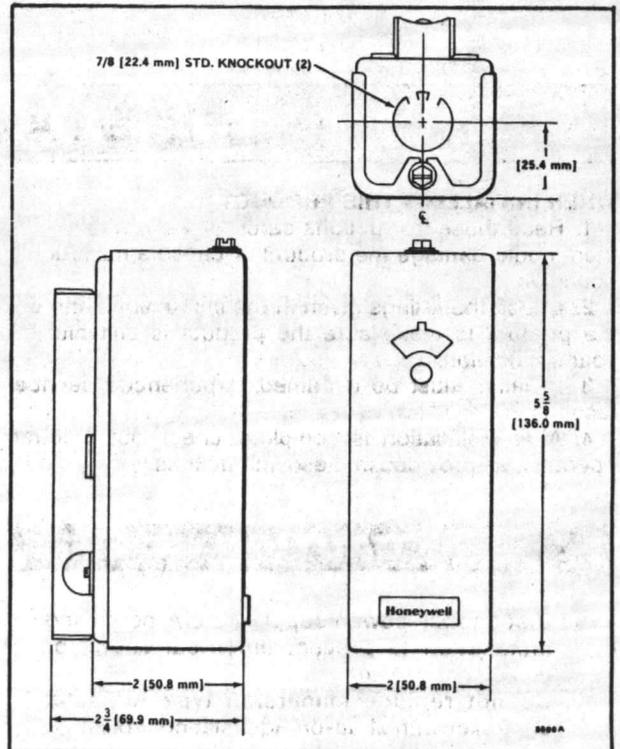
INSTALLATION DIMENSIONS IN in. [mm IN BRACKETS] FOR SURFACE MOUNT MODEL (L6006C).
